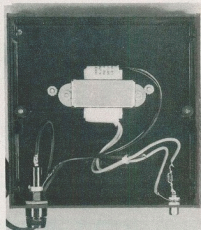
TRANSFORMER AND FUSE are mounted in their own enclosure to avoid heat generated by transformer from affecting the receiver.
